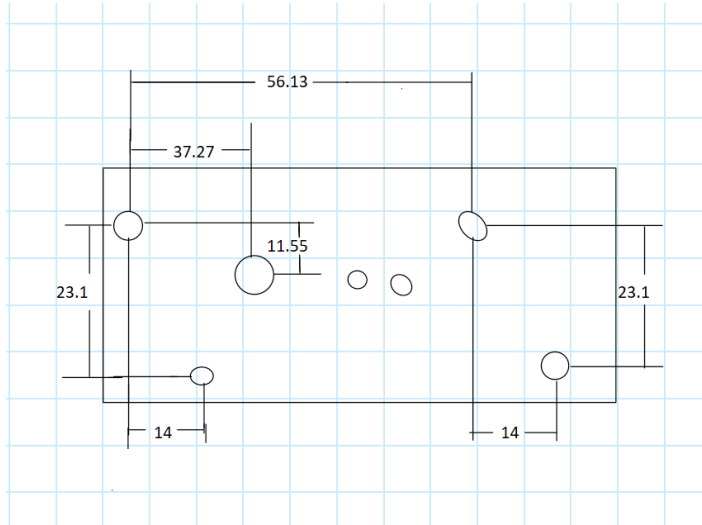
Measurements for hole placements on the motor mount and mounting plate. All measurements in millimeters.
